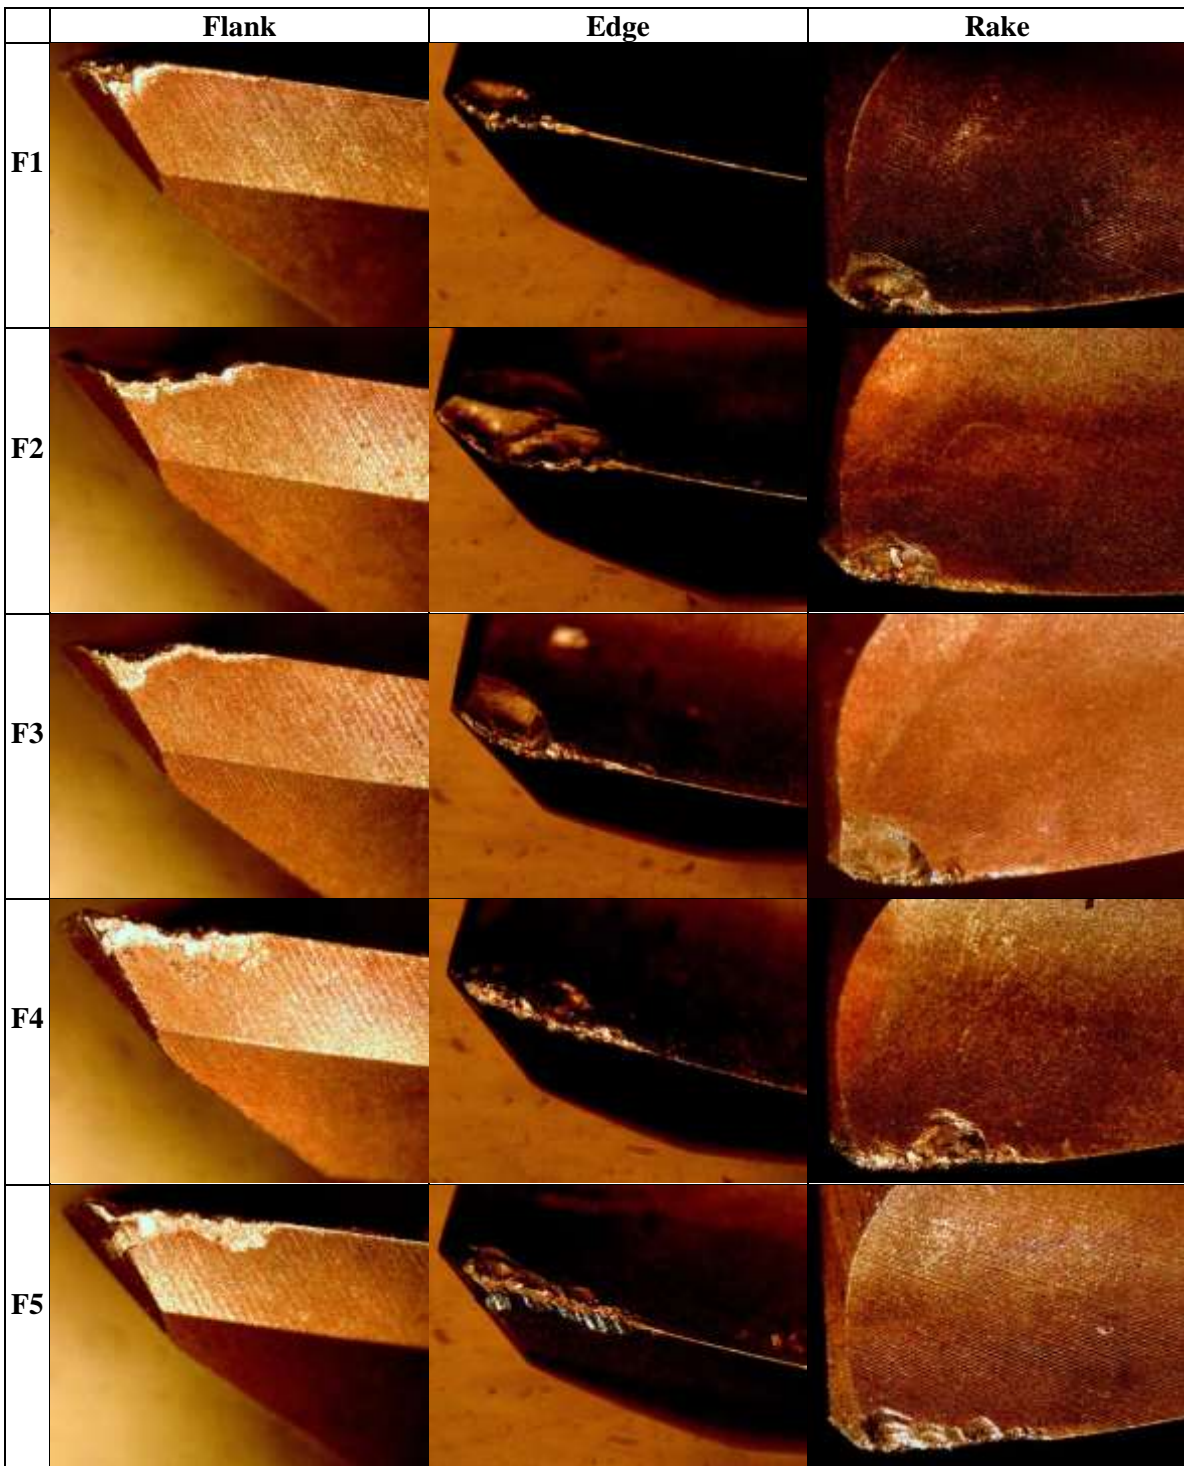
Images of tool taken with three views at rake face, cutting edge, and flank face at different cutting speeds; 60, 90, 120, 150, 180 m/min under flood cooling, taken after the wear criterion has been reached
